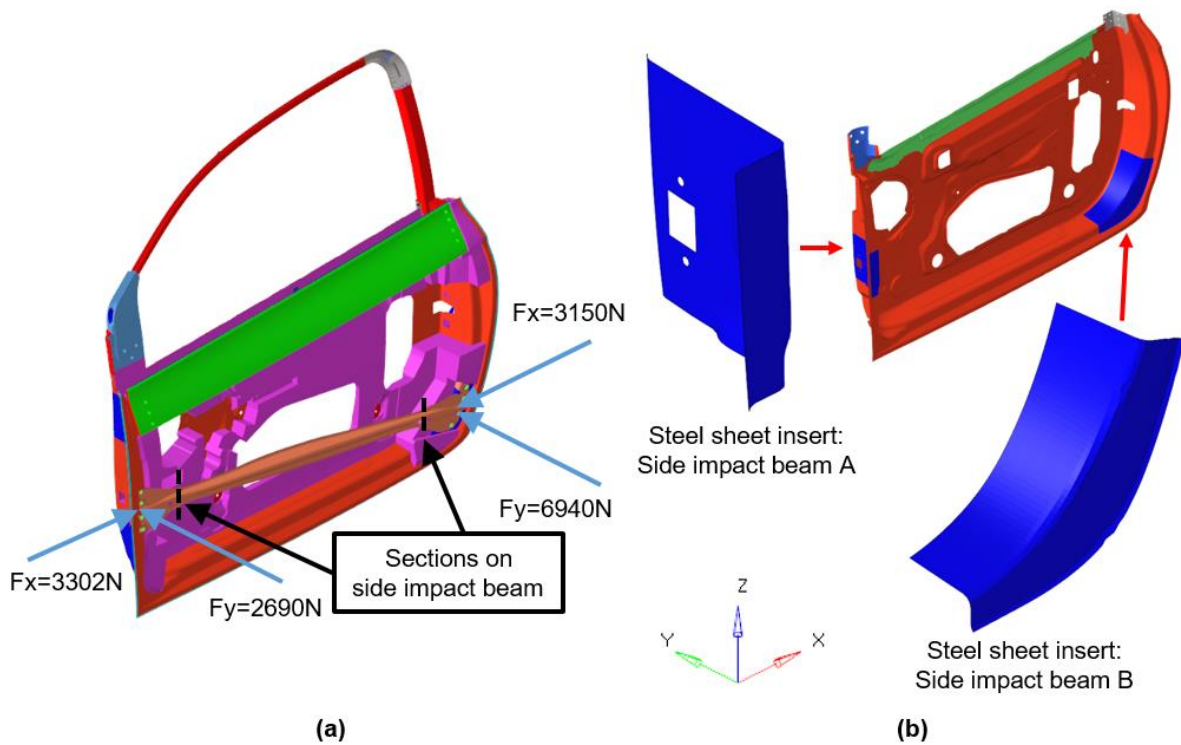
Concept 1: substituted crash loading case (a) and steel sheet inserts (b)
